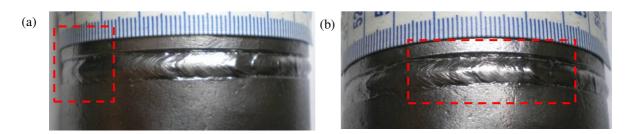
Run RD6: (a) underfill, and (b) sidewall lack of fusion.
